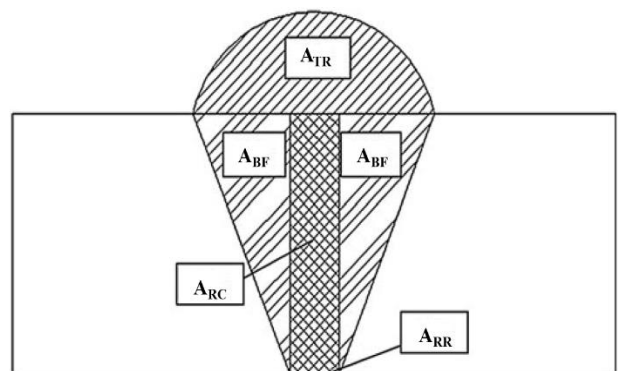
Weldment joint dilution calculation schematic view sample
